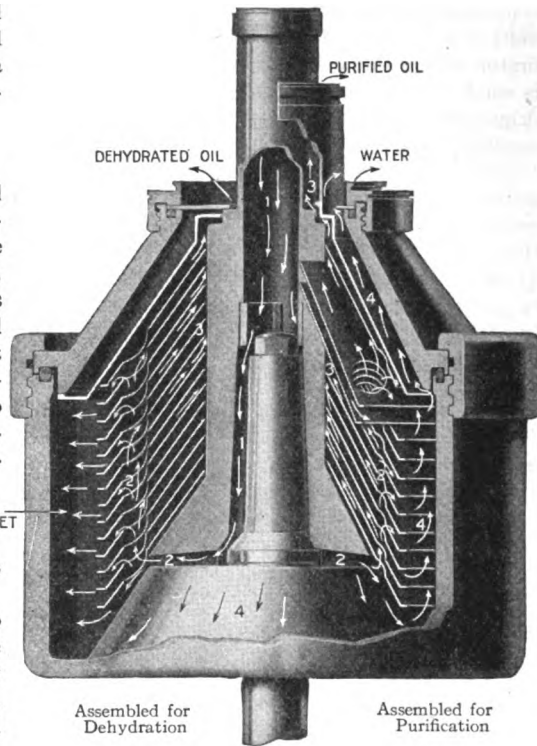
CROSS-SECTION OF THE DUAL-PURPOSE OIL PURIFIER BOWL
